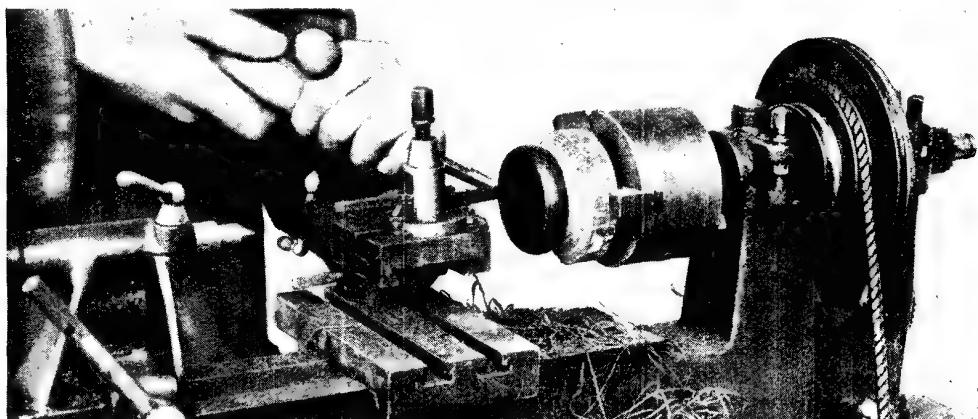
By chucking the material in the lathe a hardwood mandrel is made. The exterior is turned before screw-threading it to receive the cap. The outer surface can be shaped with a hand turning tool
